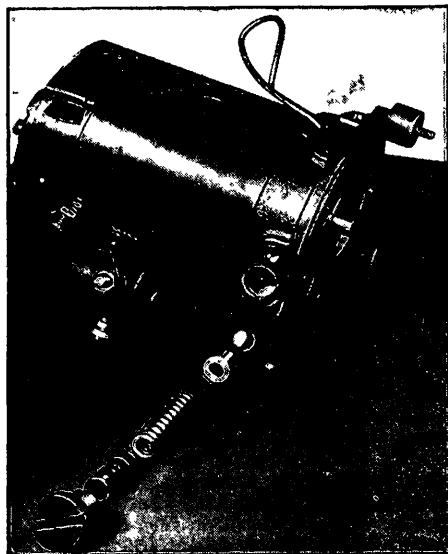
Layout of pressure relief valve parts on Moraine pump
